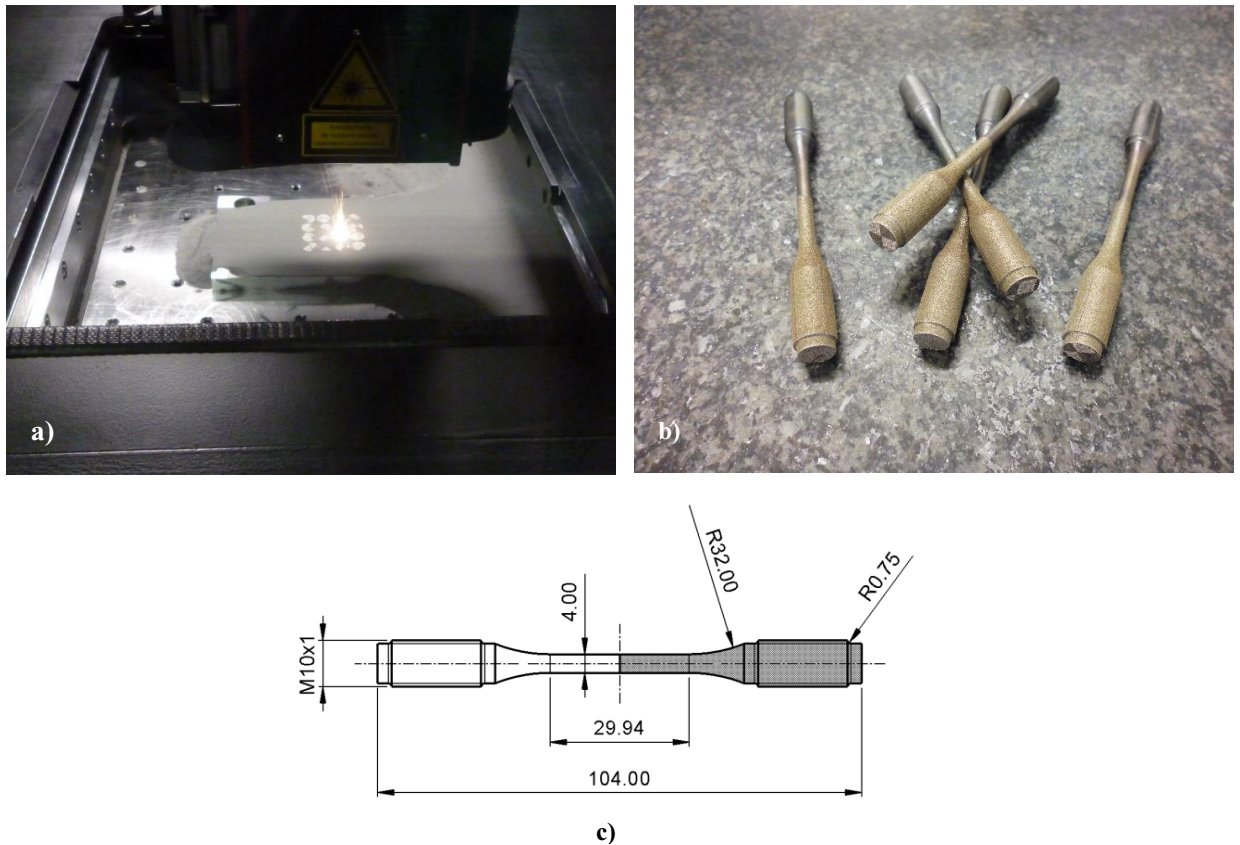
(a) Laser processing; (b) Hybrid specimens; (c) Geometry and dimensions of the specimens.
